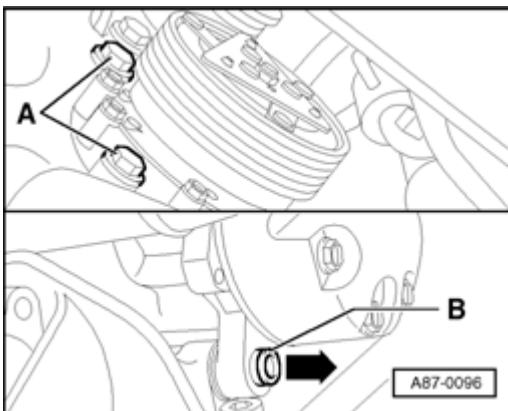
Unbolting A/C Compressor & Pressing Sliding Bushing Back Into Hole
